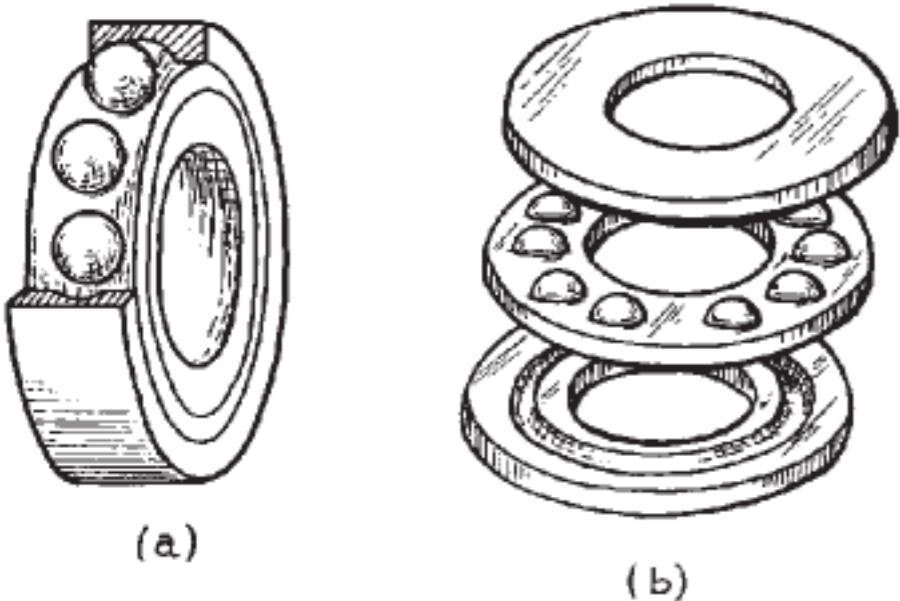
Ball bearings: (a) a radial ball bearing; (b) a thrust ball bearing.
